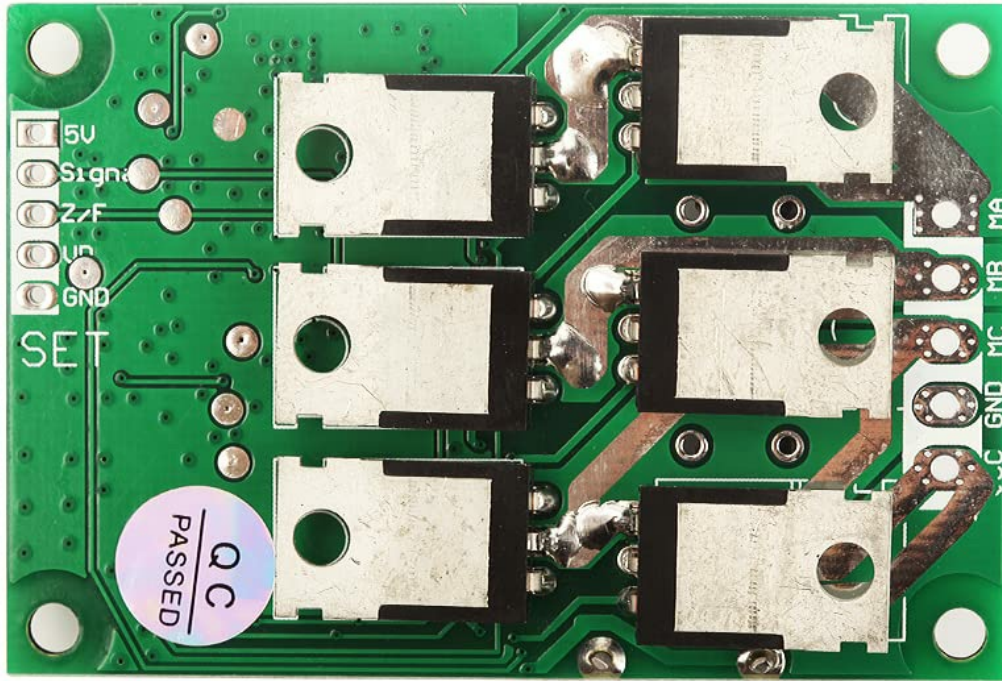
Bottom view of the JY01 controller board. This view reveals the power MOSFETs and the large copper areas designed for heat dissipation, crucial for the board's performance under load. A "QC PASSED" sticker is also visible.
